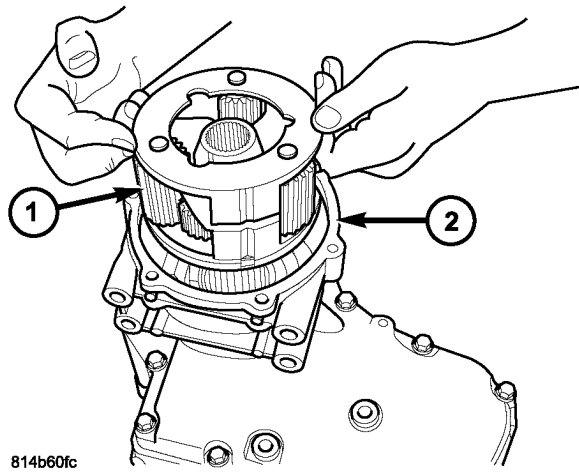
REMOVE PLANETARY GEAR SYSTEM
